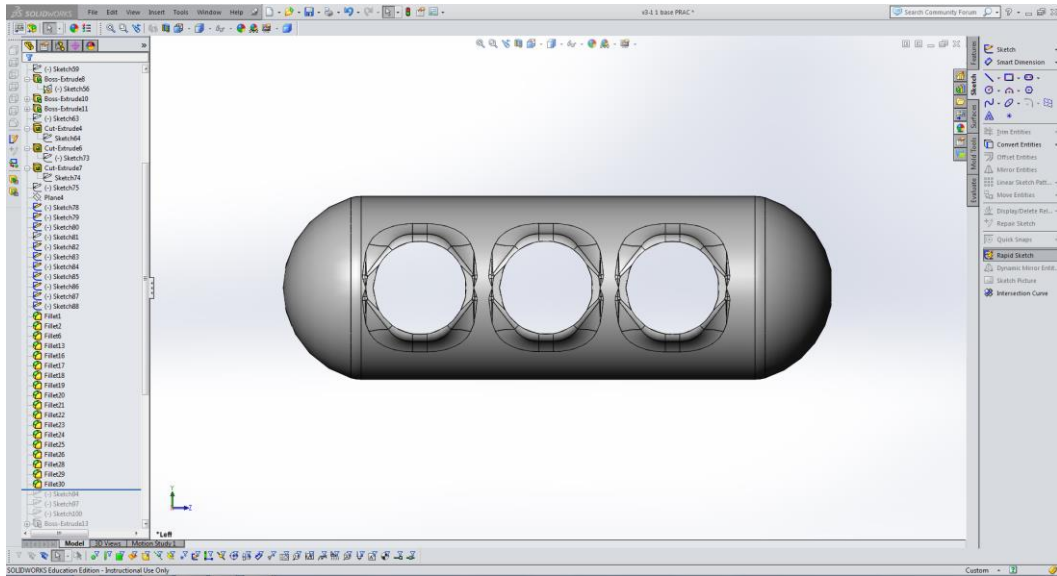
The smoothed protruding transducer holders after the application of the “fillet” tool
